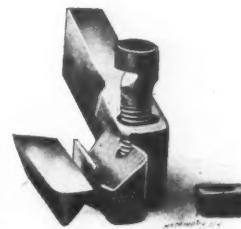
The Holder with Blade Removed, showing Method of Holding
